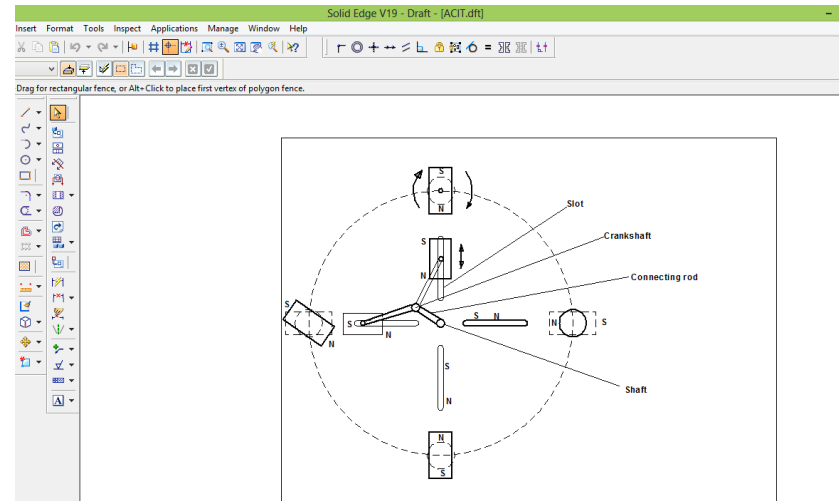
SOLID EDGE V19 DRAWING. This figure shows the events taking place when one of the inner magnet approaches respective outer magnet.
